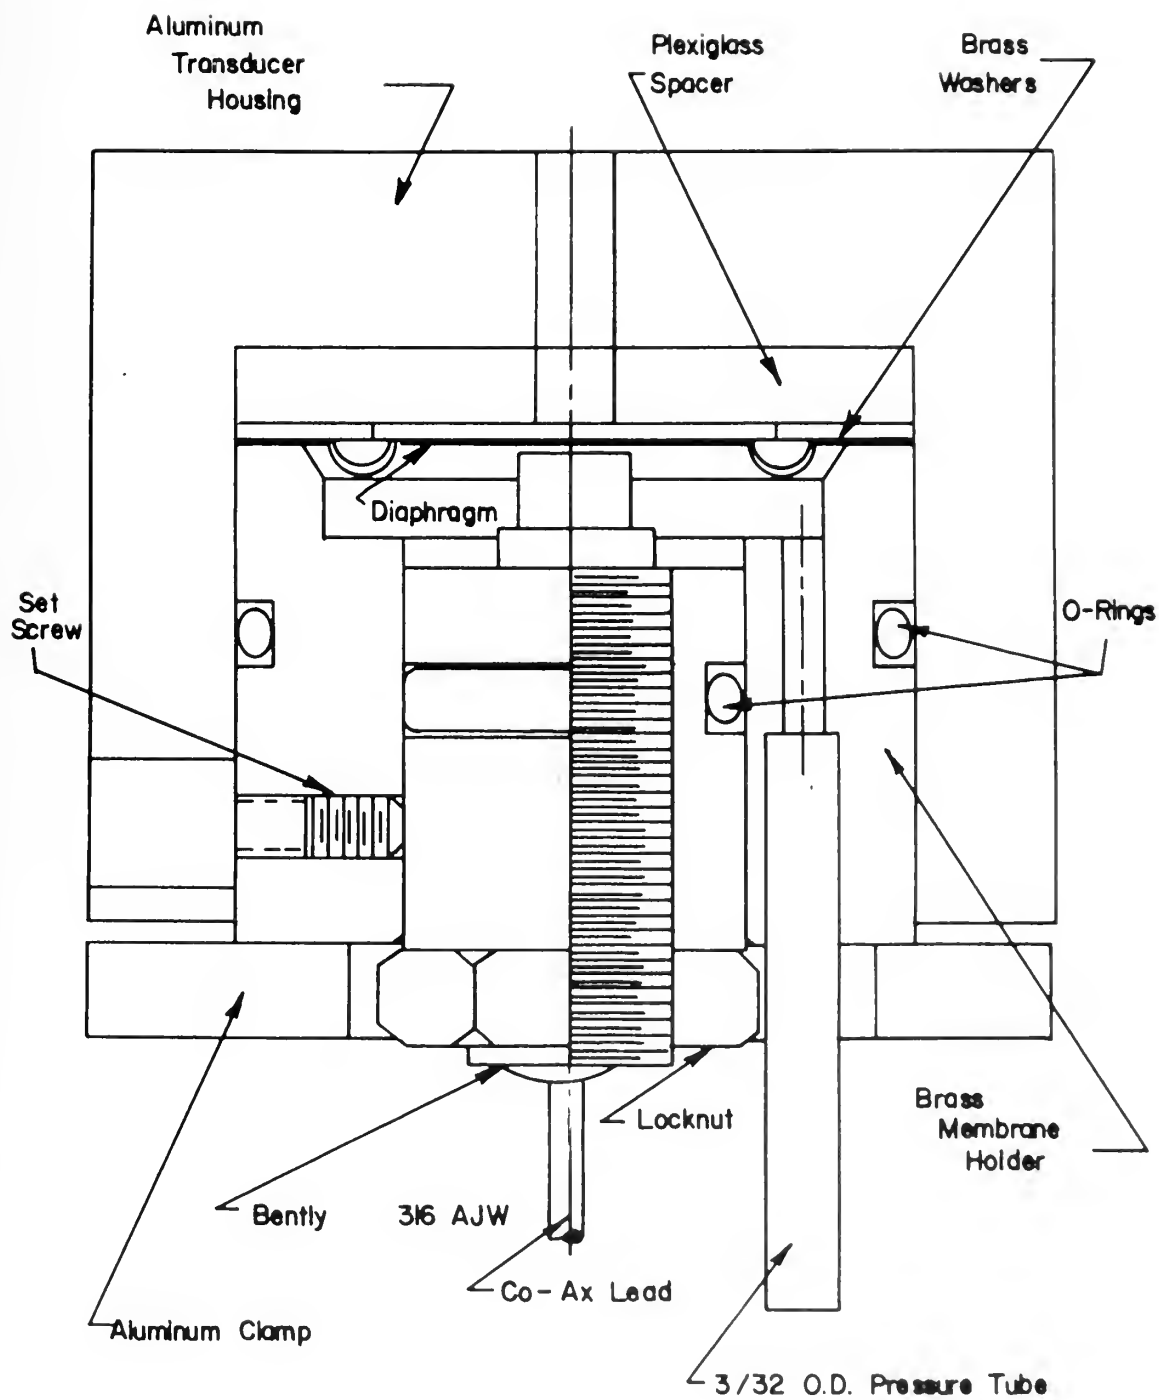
SECTIONAL DRAWING OF PRESSURE TRANSDUCER
